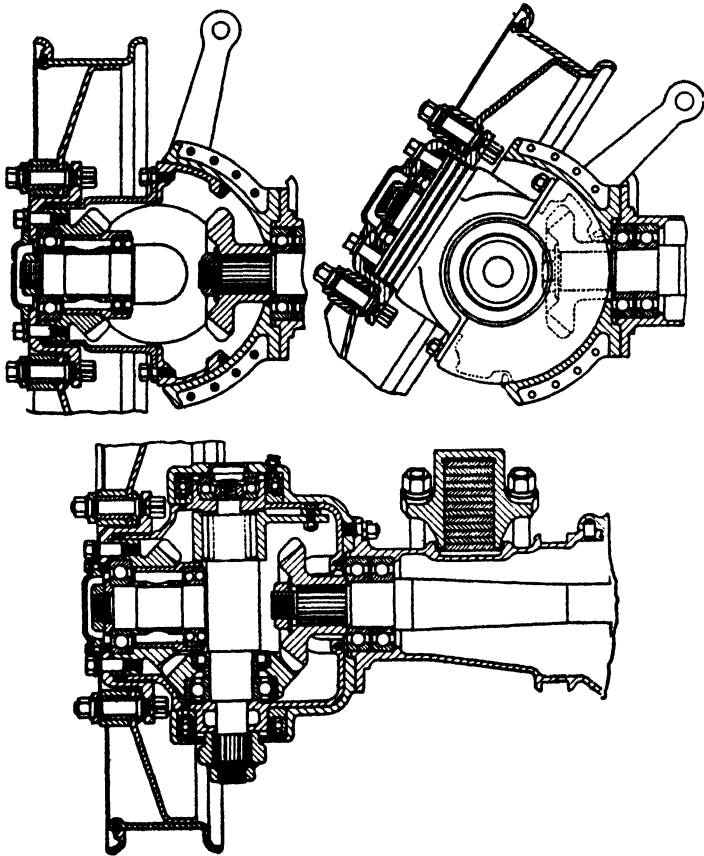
FRONT-WHEEL DRIVE THROUGH BEVEL GEARS (EARLY BRITISH WAR OFFICE DESIGN).
